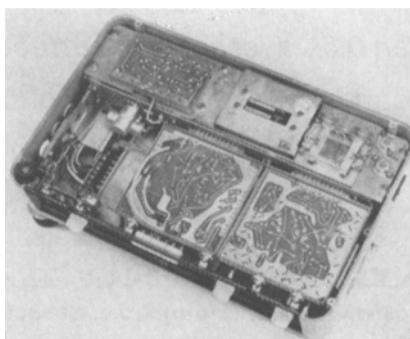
Chassis and printed socket board layout of 12-W amplifier.
